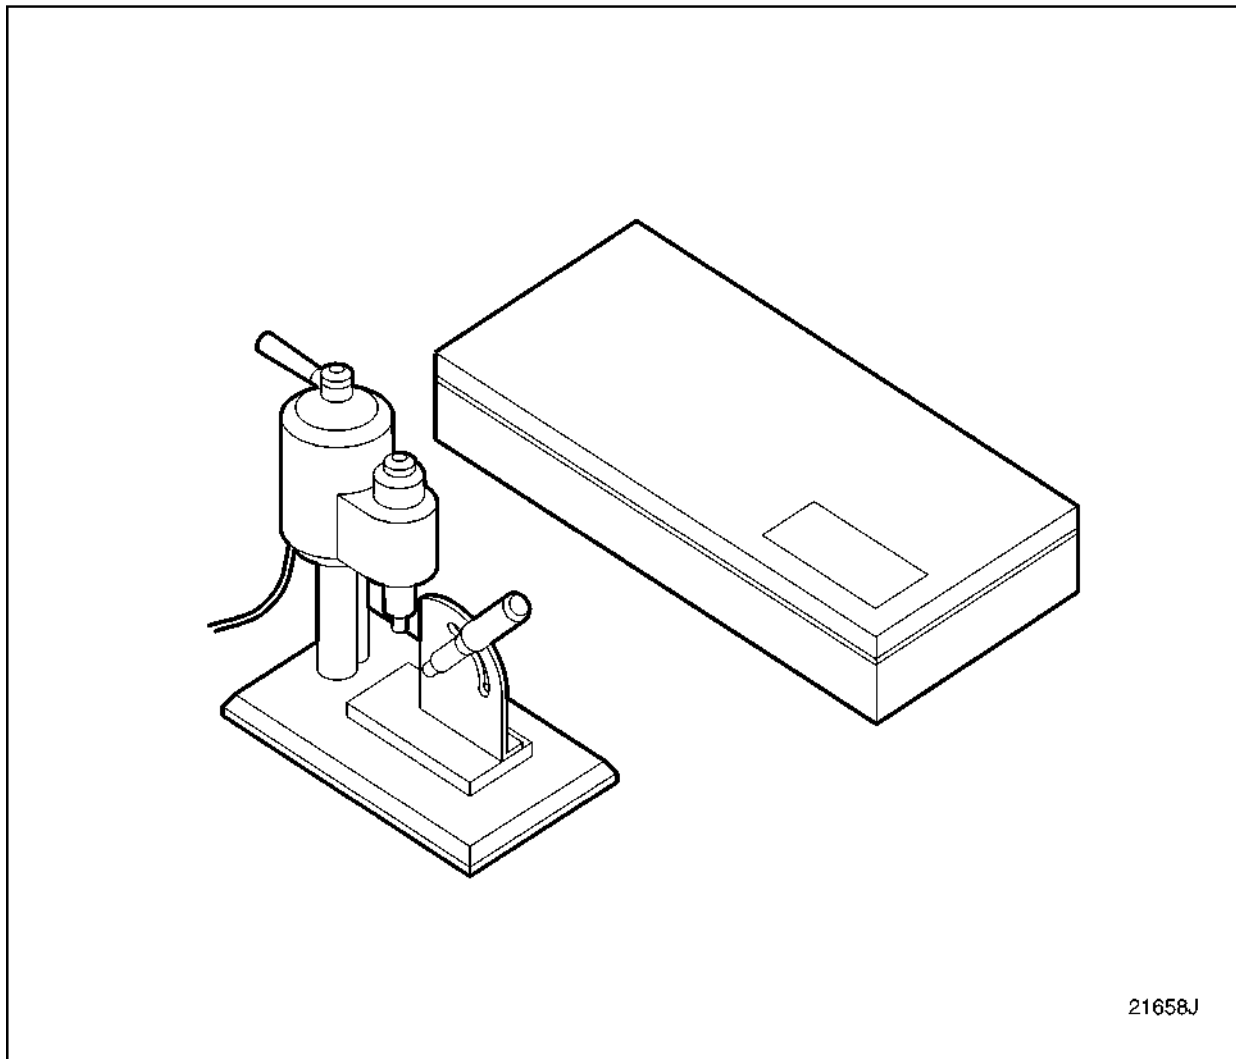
Valve Seat Grinder -Less Stone/Pilot,J 7040-A
